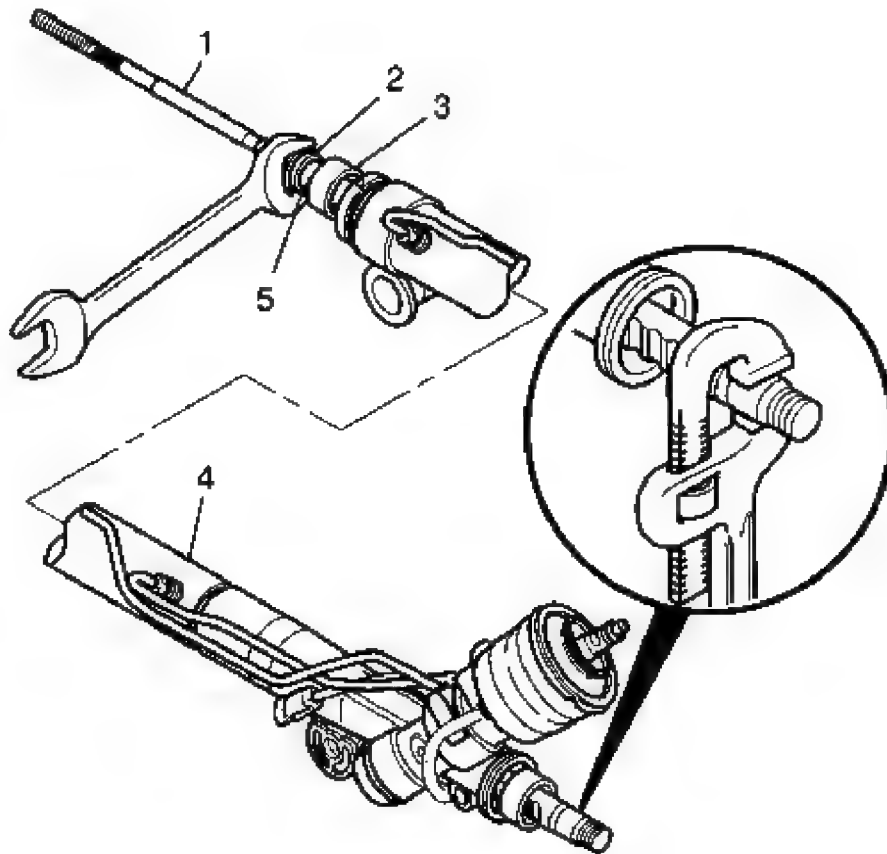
View of Shock Dampener, Inner Tie Rod Housing, Rack and Inner Tie Rod
